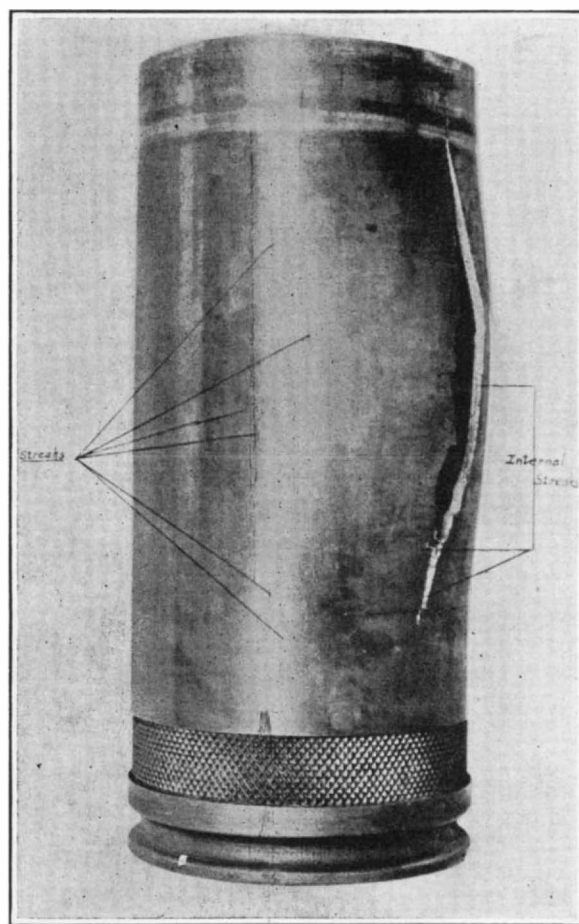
6 inch shrapnel case burst by the testing fixture shown in Fig. 3.
